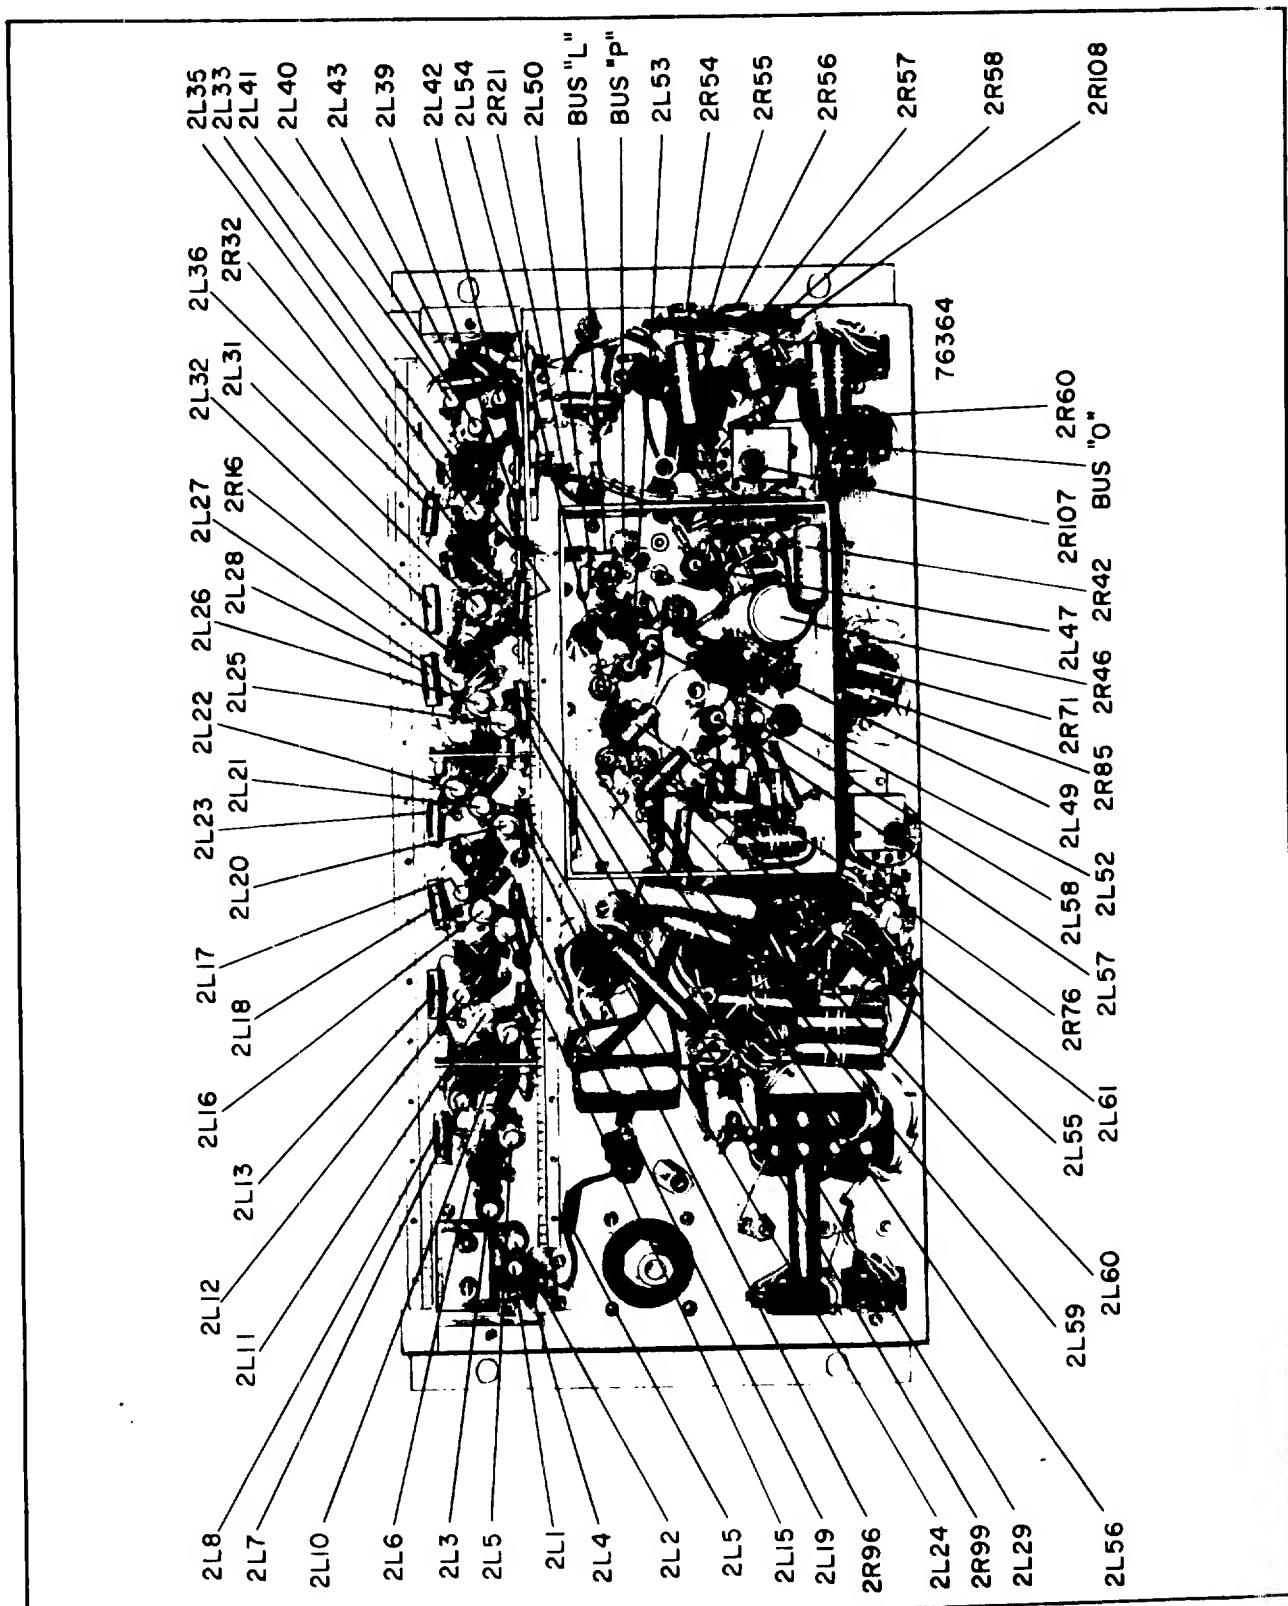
Receiver/Modulator, MI-31102-A—Rear View, Dust Cover and Shield Covers Removed
